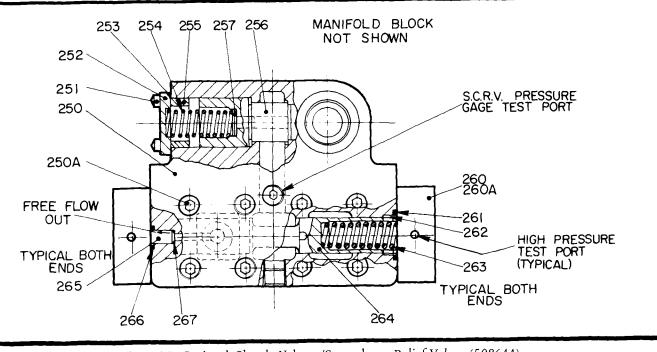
Optional Shuttle Valve w/Supercharge Relief Valve. (508644)
